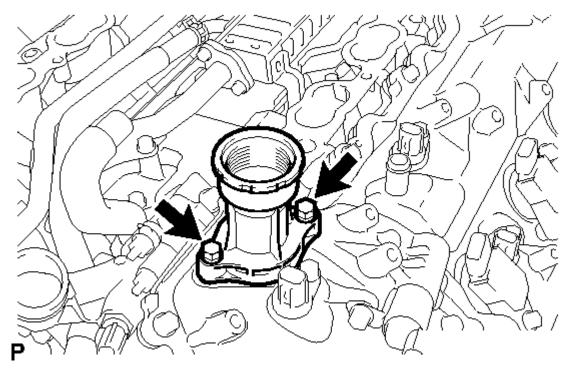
Removing The 2 Bolts, Filler Cap Housing And Gasket
